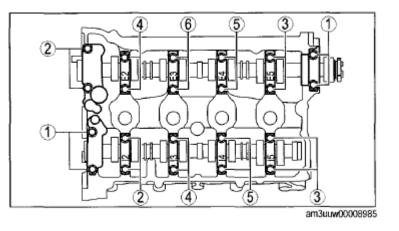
Identifying Camshaft Cap Bolt Loosening Sequence
